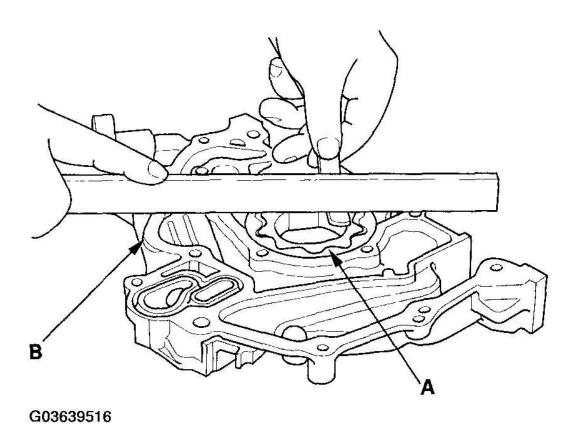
Checking Housing-To-Rotor Axial Clearance Between Rotors And Pump Housing Courtesy of AMERICAN HONDA MOTOR CO., INC.
